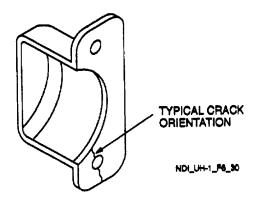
Tail Rotor Control Tube and Quill - Sprocket Guard
